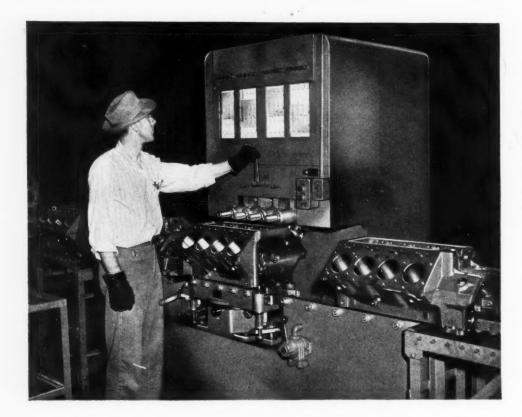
Multiple-spindle Inspection Machine for Checking the Diameter, Out-of-roundness, Taper, and Bell-mouth of the Cylinder Bores in V-8 Engine Blocks
